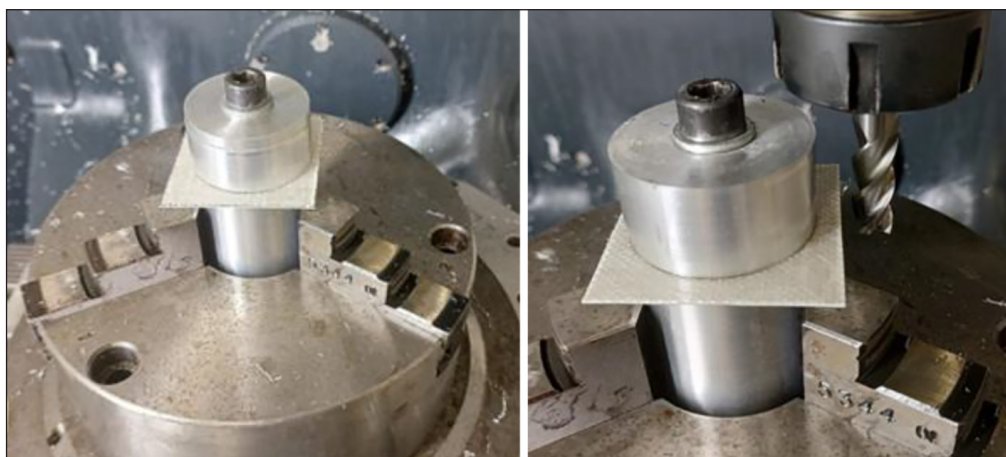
View of the workpiece secured to the table of the DMU 50 machine tool using a special clamp
